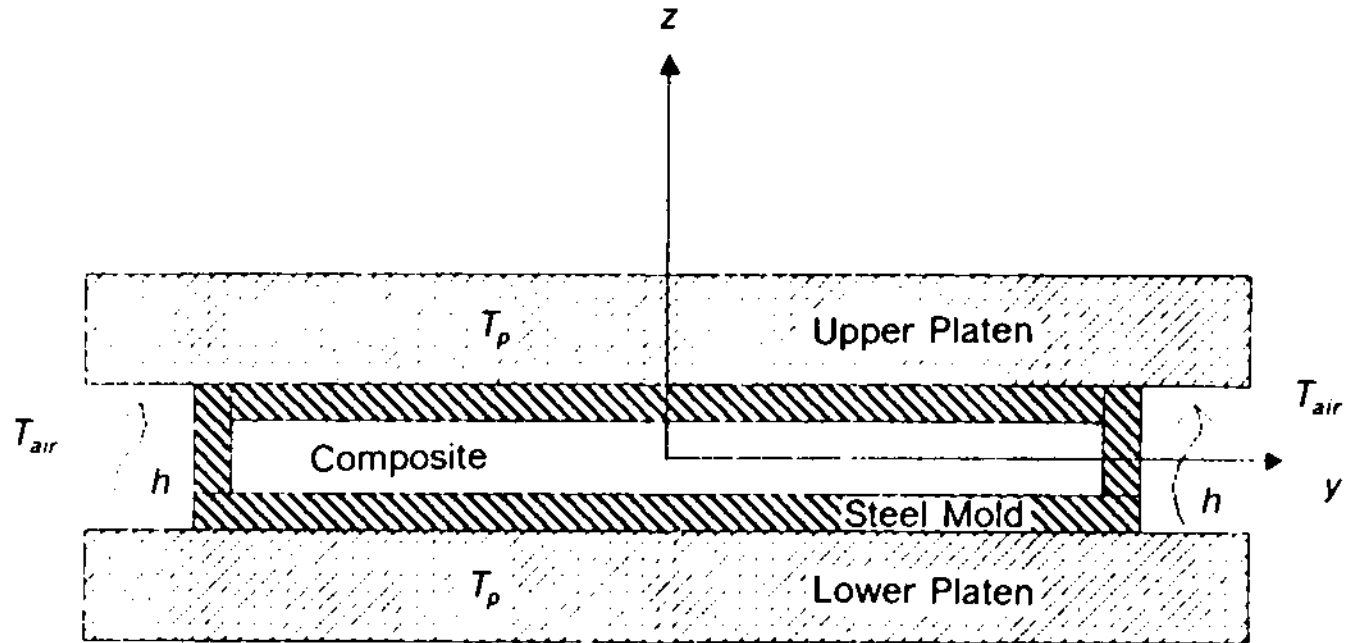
Cross-section of the 192-ply AS4/P1700 unidirectional composite processing assembly.
